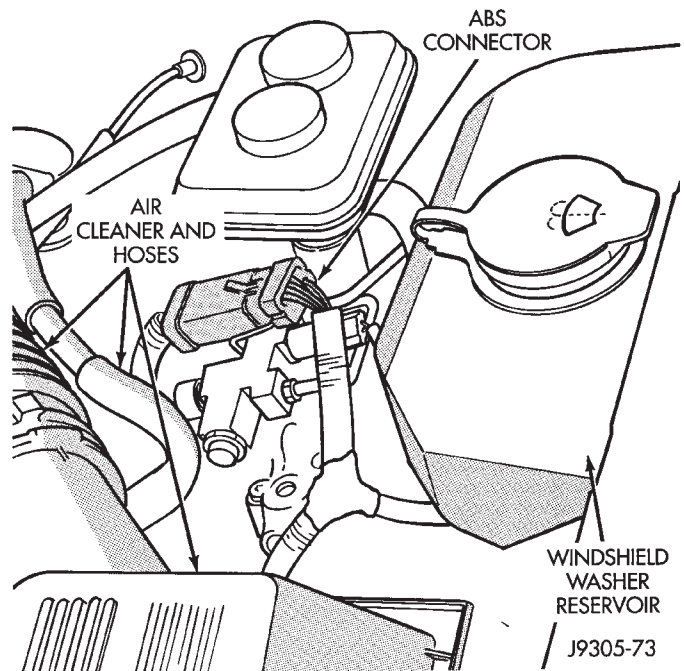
Components To Be Removed/Disconnected For HCU Access
